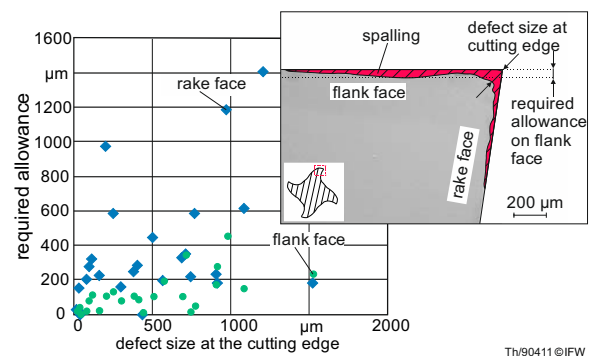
Required allowance at the rake or flank face that is necessary in order to remove all spallings and other defects on the flank face
